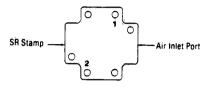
SOCKET-HEAD CAPSCREW LOCATIONS.
